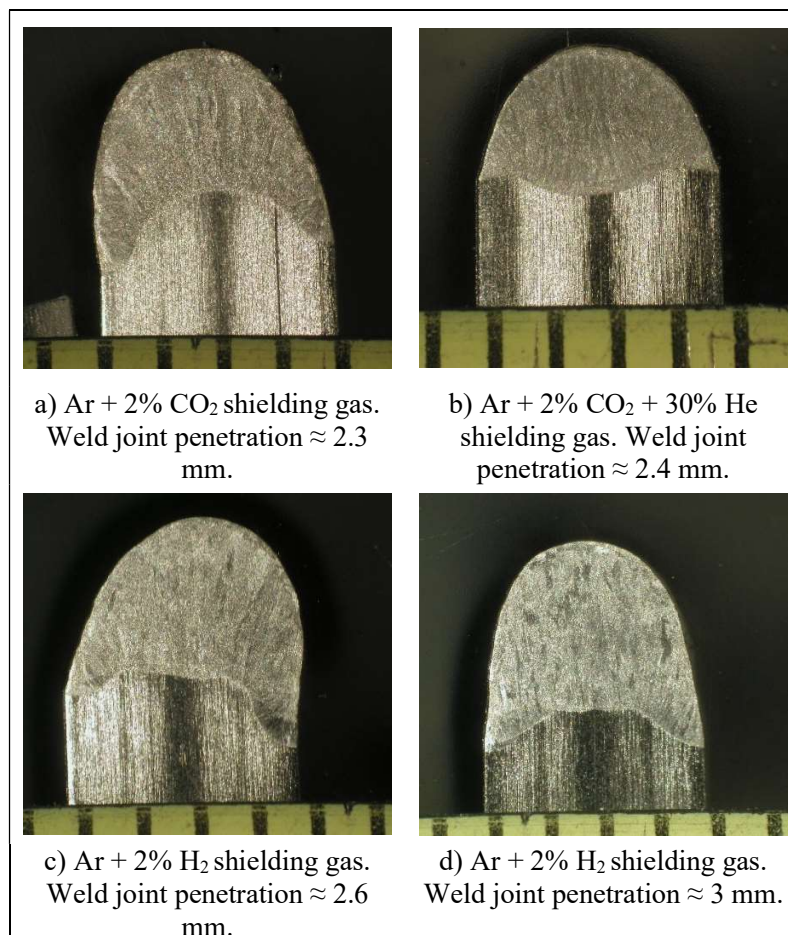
Edge joint weld cross-sections produced in vertical-up (PF) position and using optimized welding parameters and with different shield gas composition variants tested in the experiments of phase 2. In the scale strip, one interval corresponds to 1 mm.
